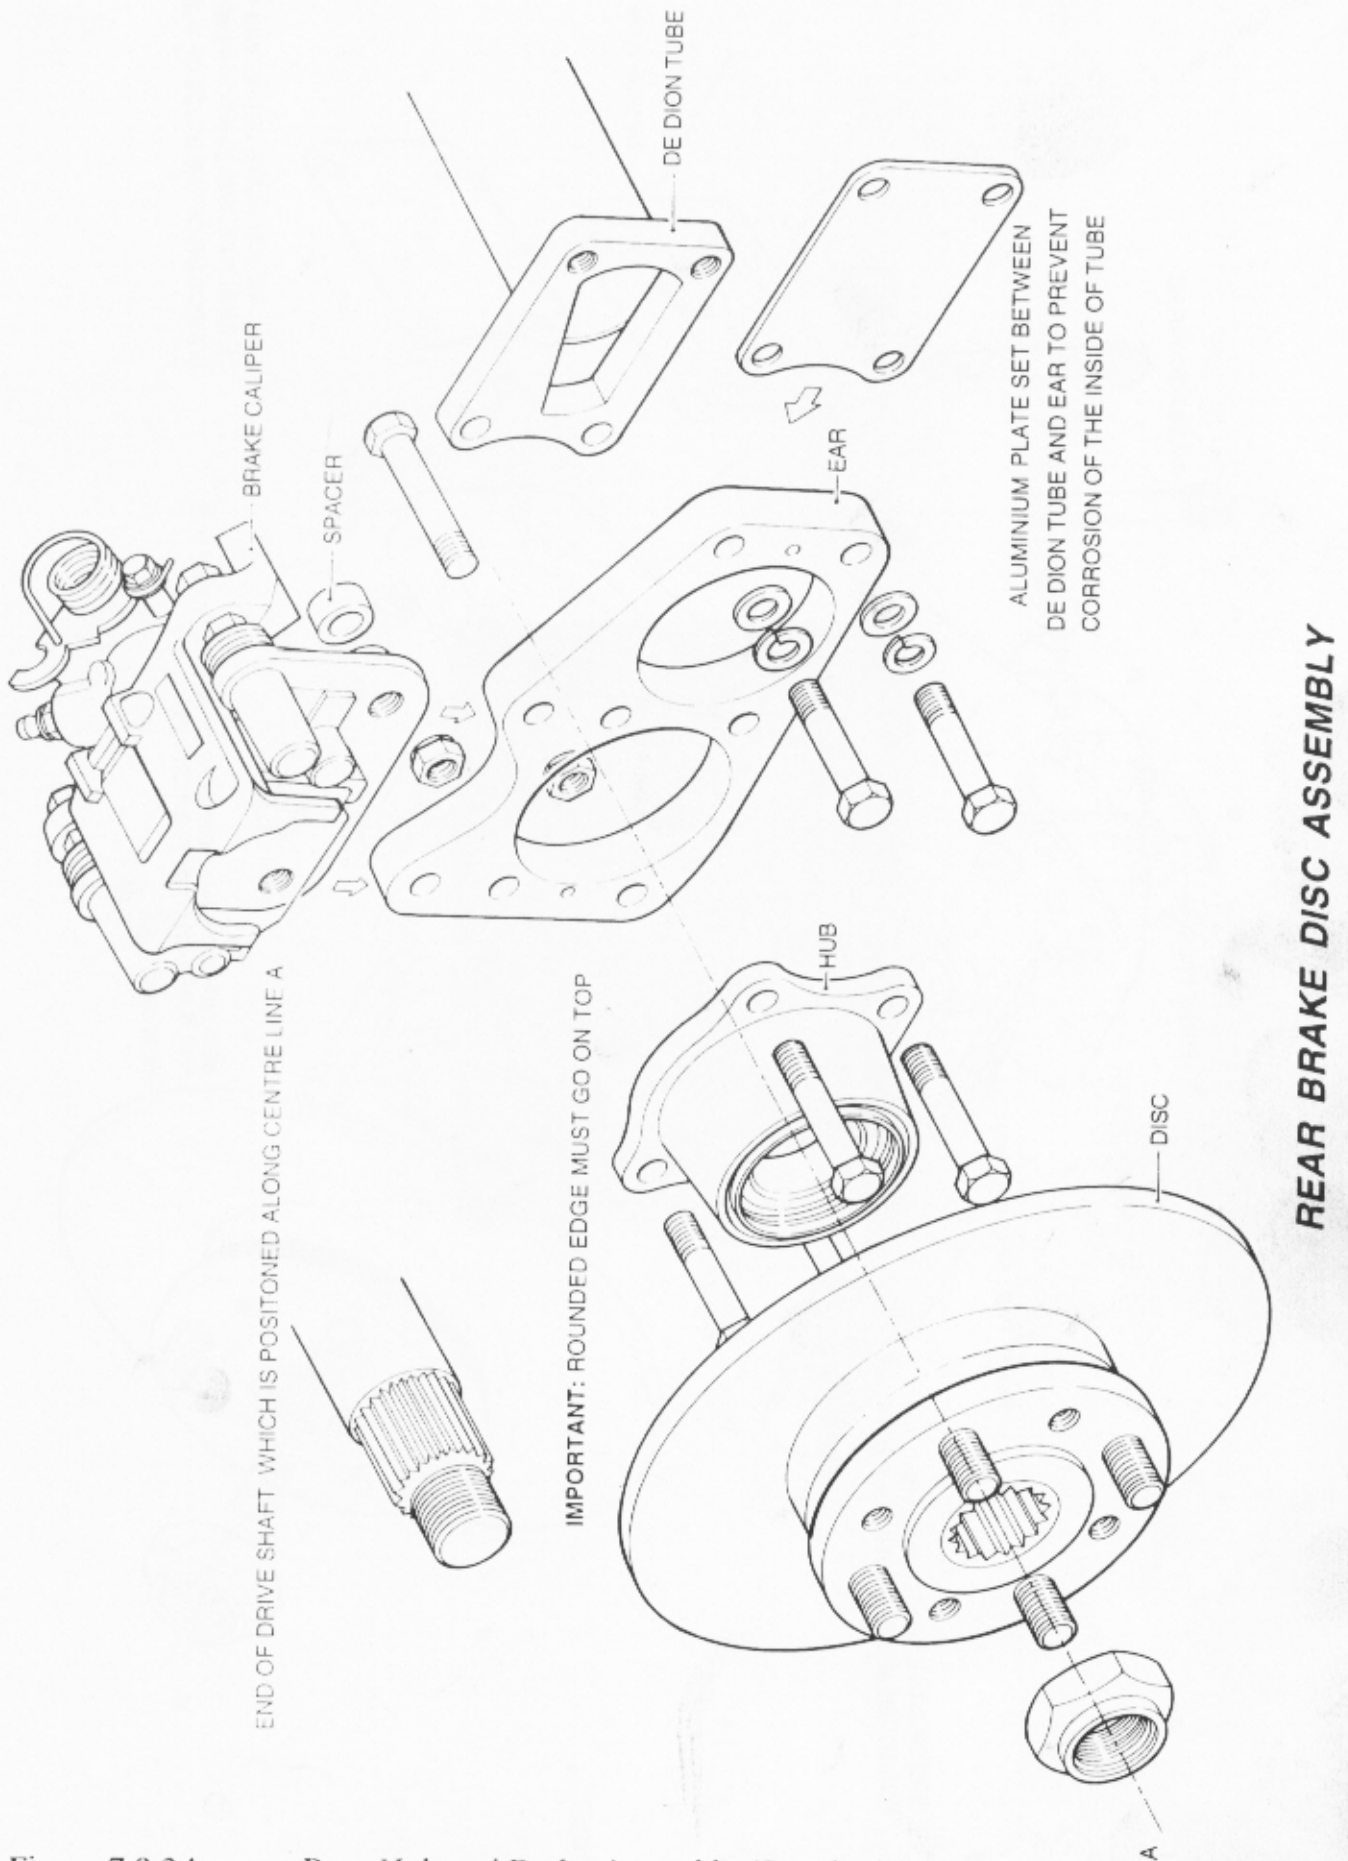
A Rear Hub and Brake Assembly (Standard Brakes)
